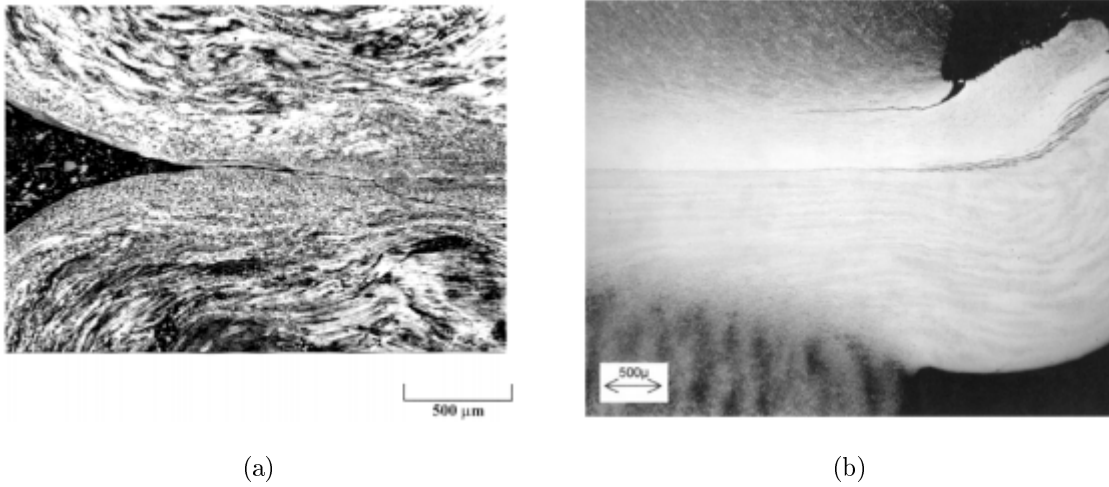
Defects in linear friction welds: (a) weld in Ti-48Al-2Cr-2Nb showing a crack penetrating into the parent material geometry from the flash; and (b) weld between a martensitic (top) and stainless (bottom) steel showing cracking in the heat affected zone of the martensitic steel as a result of rapid amplitude decay<sup>71</sup>.
